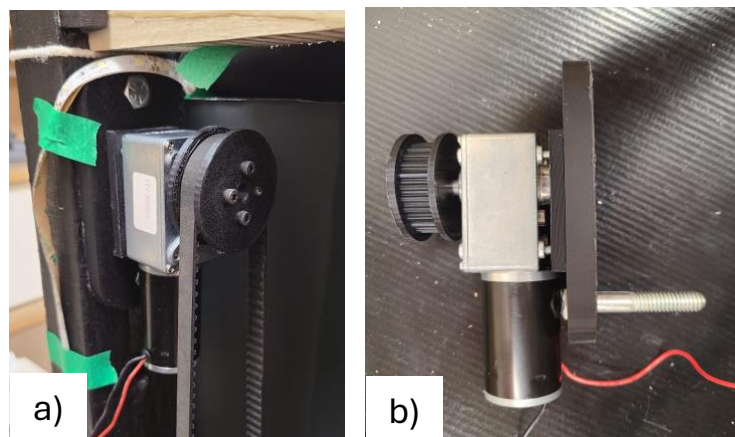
a) The DC motor mount design in the final design of the automated recycling sorter. b) An isolated view of the DC motor, the mounted gear and the associated mounting bracket.
